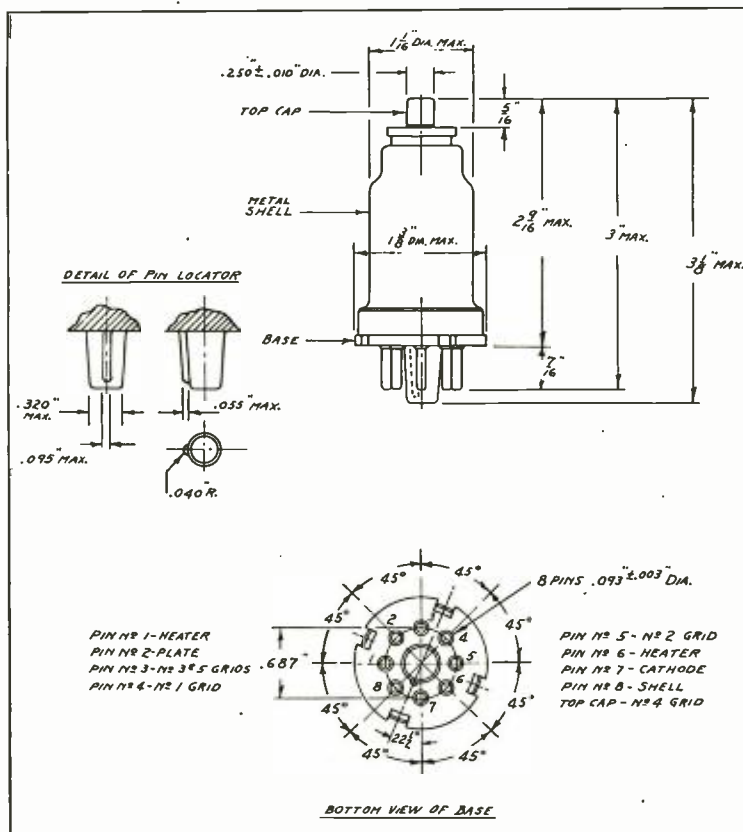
Outline drawing of the "6A8" pentagrid converter, with dimensions, base details and detail of the pin locator.
